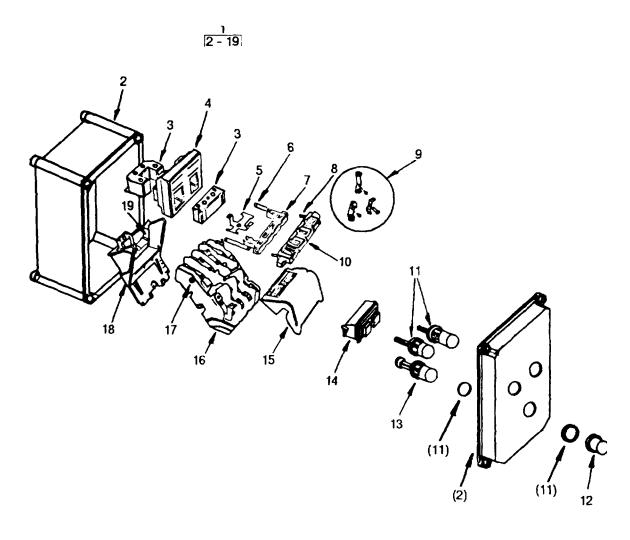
CIRCULATING PUMP MOTOR STARTER.
